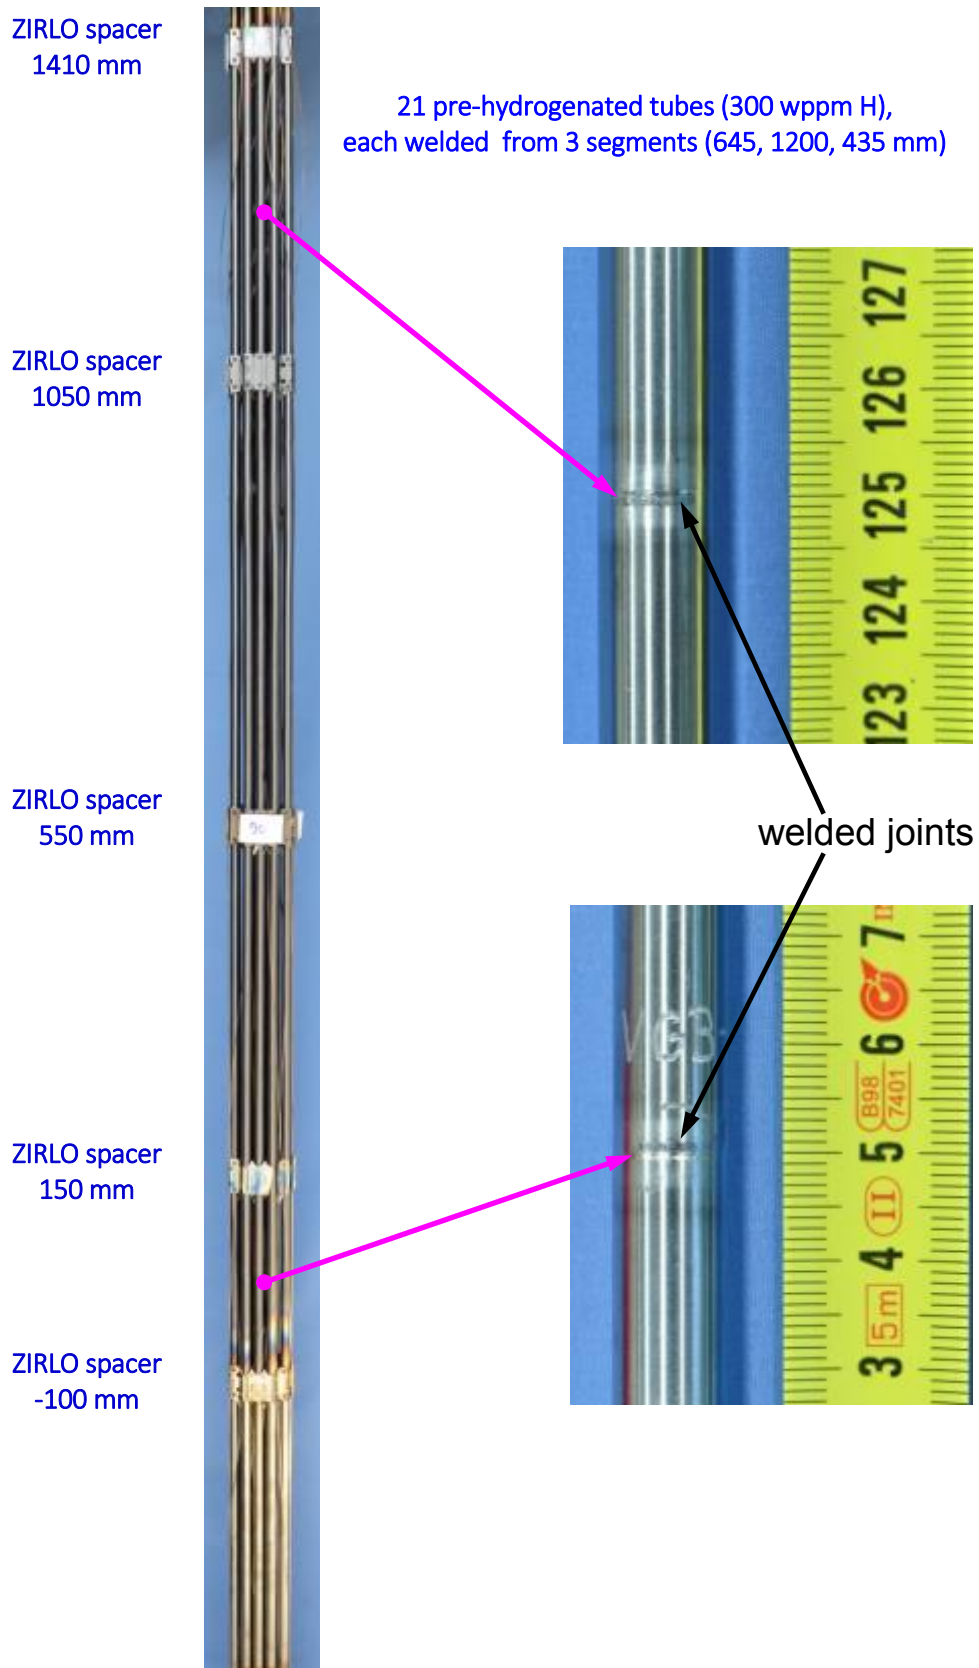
QUENCH-L5; Welding of pre-hydrogenated claddings.
